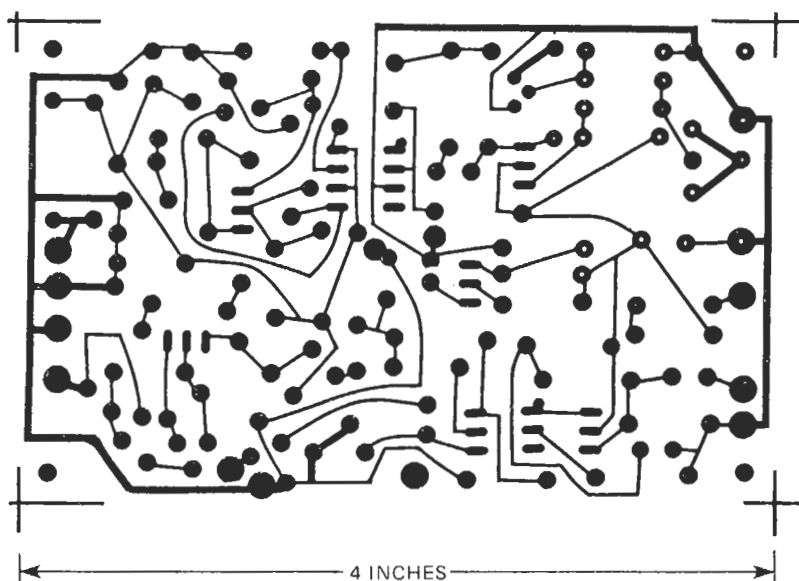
SINGLE-SIDED PC BOARD is small enough to fit comfortably inside most TV sets.
